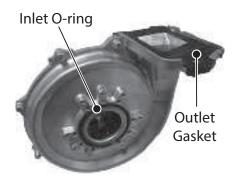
Install inlet O-ring and outlet gasket to new fan assembly
